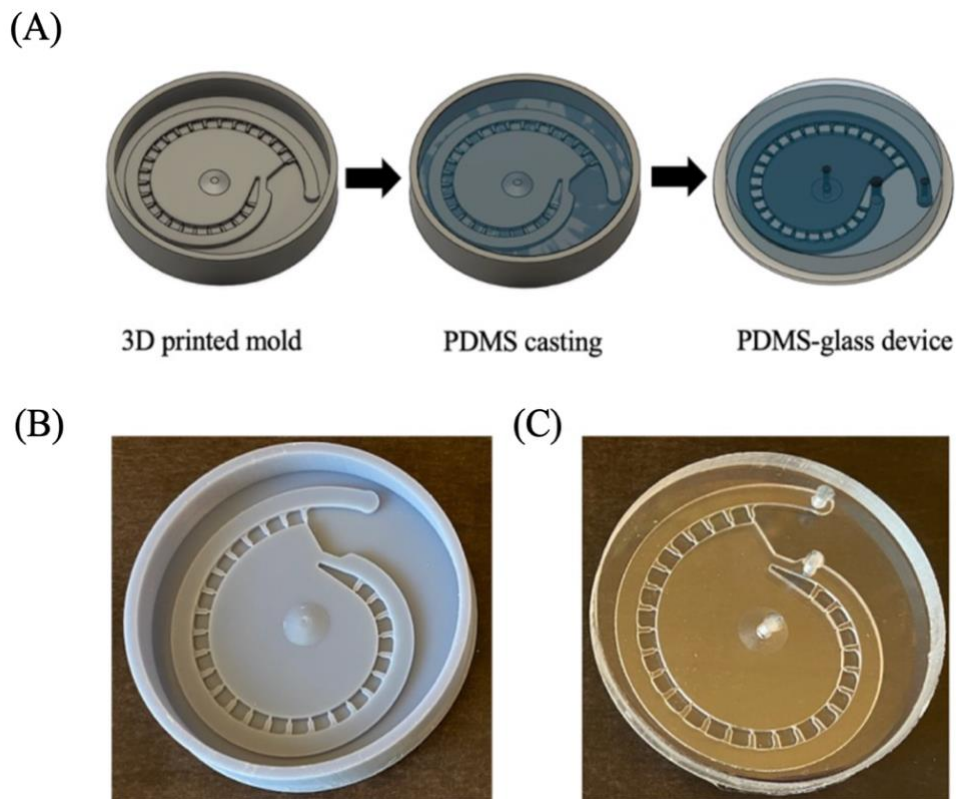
The 3D SLA printer assisted ZOC prototyping. A) The ZOC prototyping pipeline. B) Photography showing the 3D SLA printed negative master mold for the ZOC device. C) Photography showing the assembled PDMS-glass device after soft lithography.
